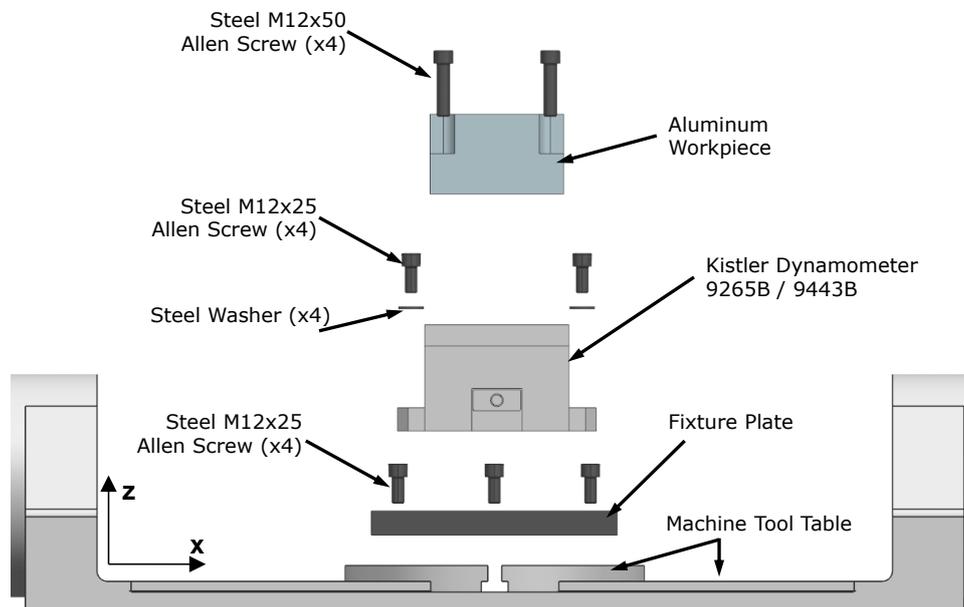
Exploded view of the fixture system used for the cutting speed experiments.
